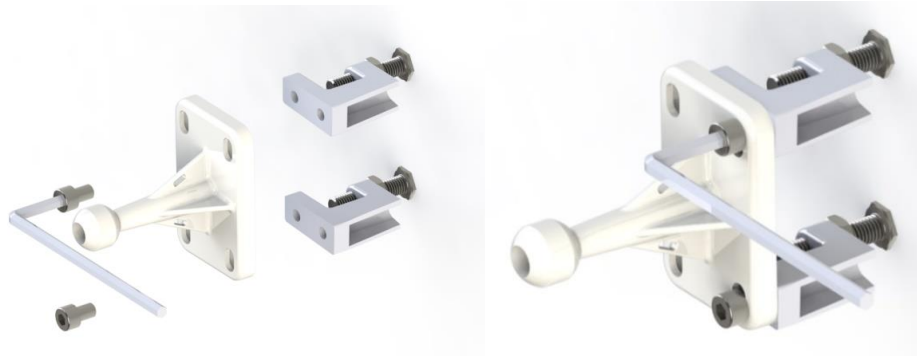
Screwing the I-Beam clamp onto the mounting bracket
